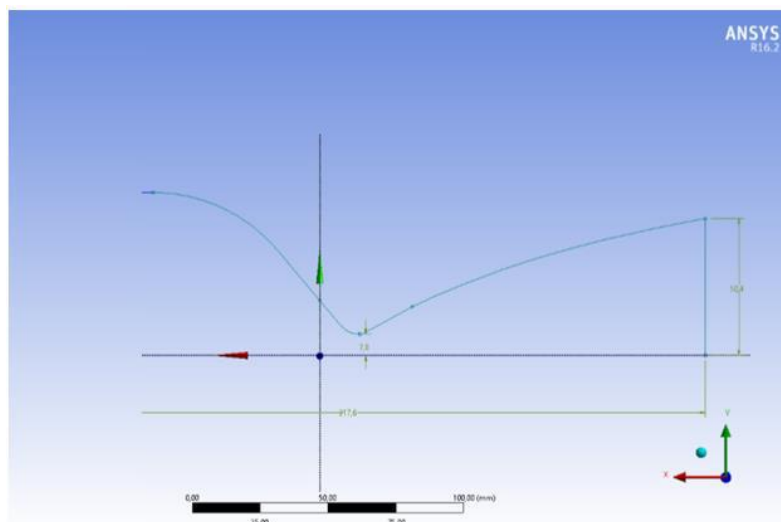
Technical drawing of the combustion chambre with the nozzle.
